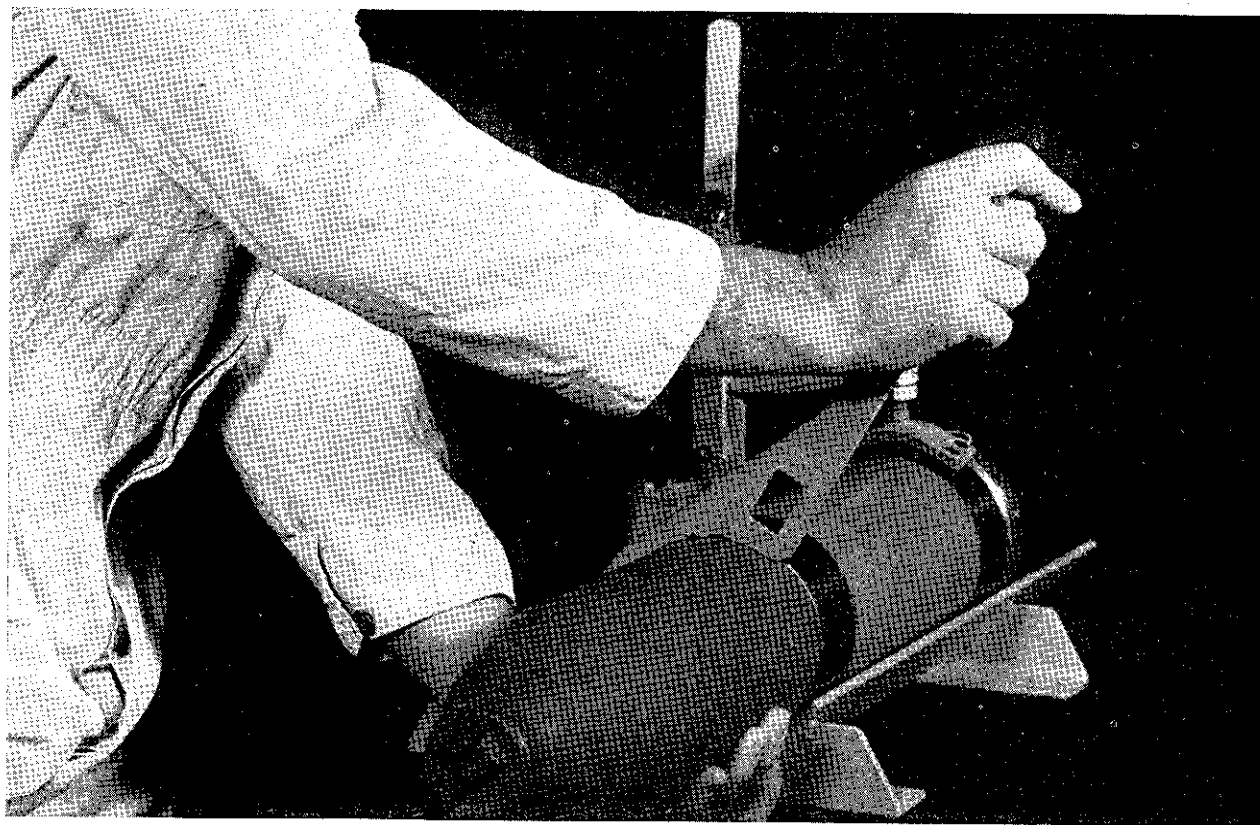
Use of Spanner Wrench in Assembly of Head and Motor.
